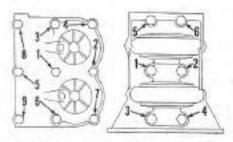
On Fishing Scott motors tighten the cylinder head screws to a torque of 100 inch pounds in the sequence shown in the left view, Tighten the crank-case screws to a torque of 100 inch pounds in the sequence shown in the right view.
